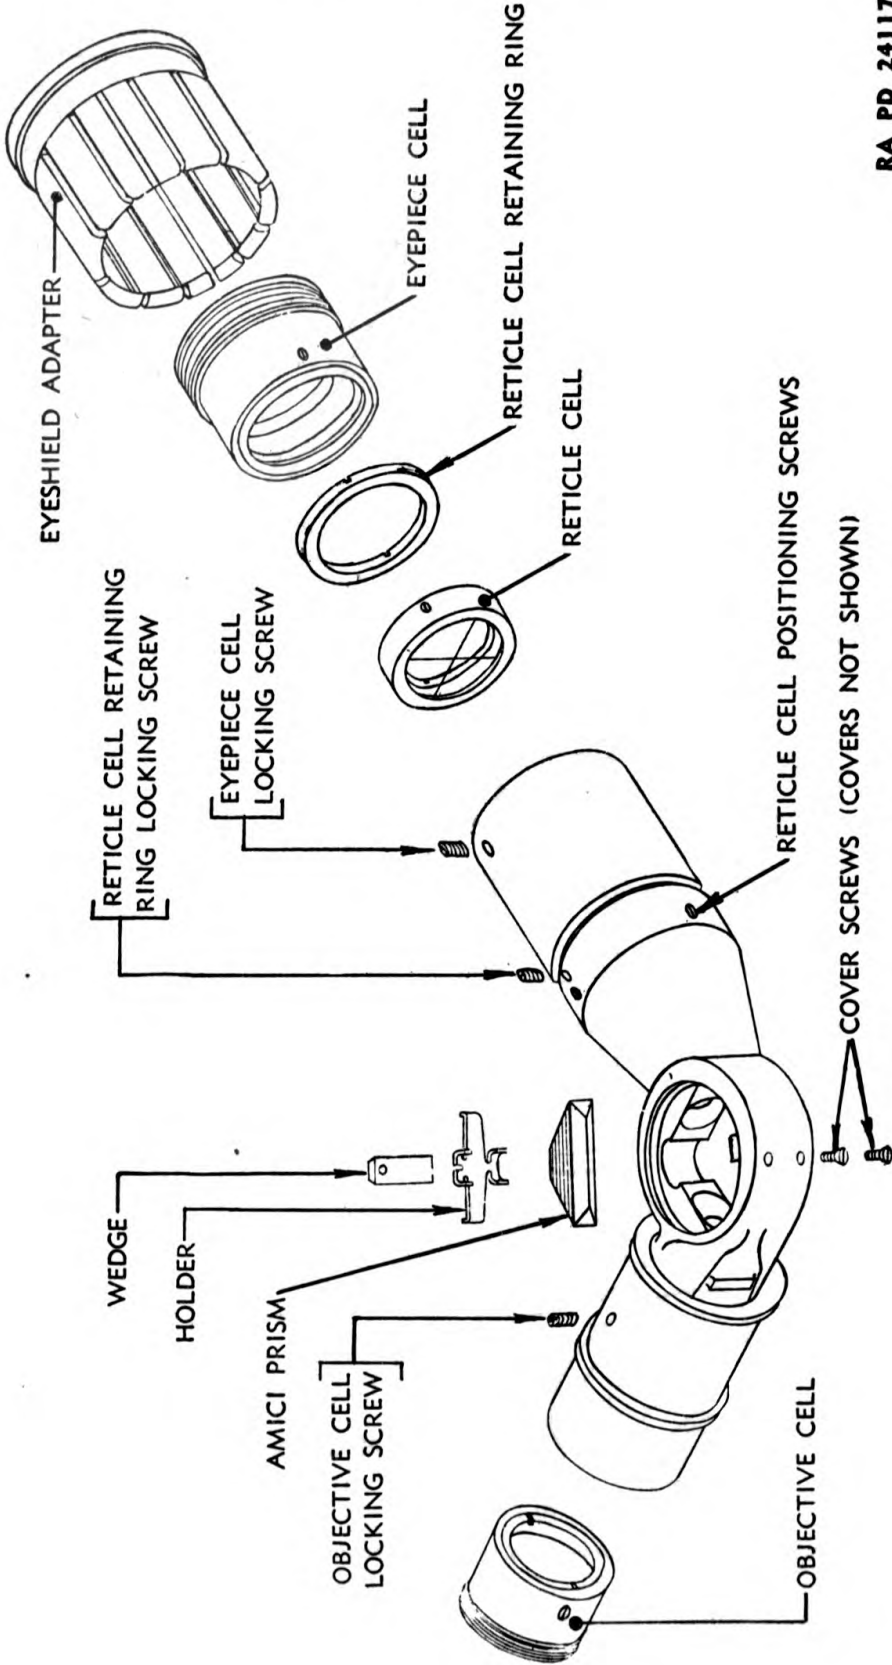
Elbow telescope M24, M25, M26, exploded view.
